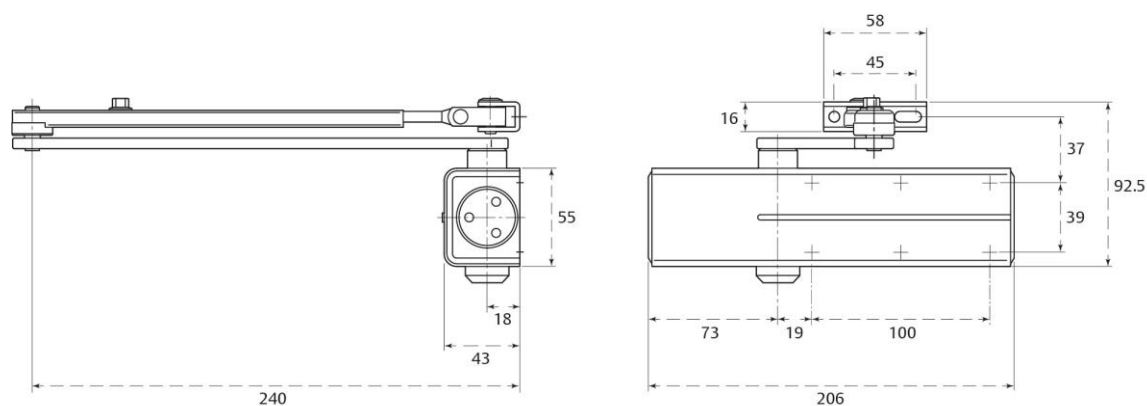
Manufacturer drawing of item 12 Door Closer 2
